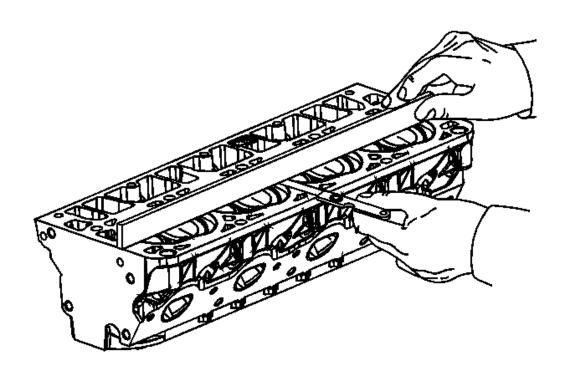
Inspecting Cylinder Head For Warpage Courtesy of GENERAL MOTORS CORP.
